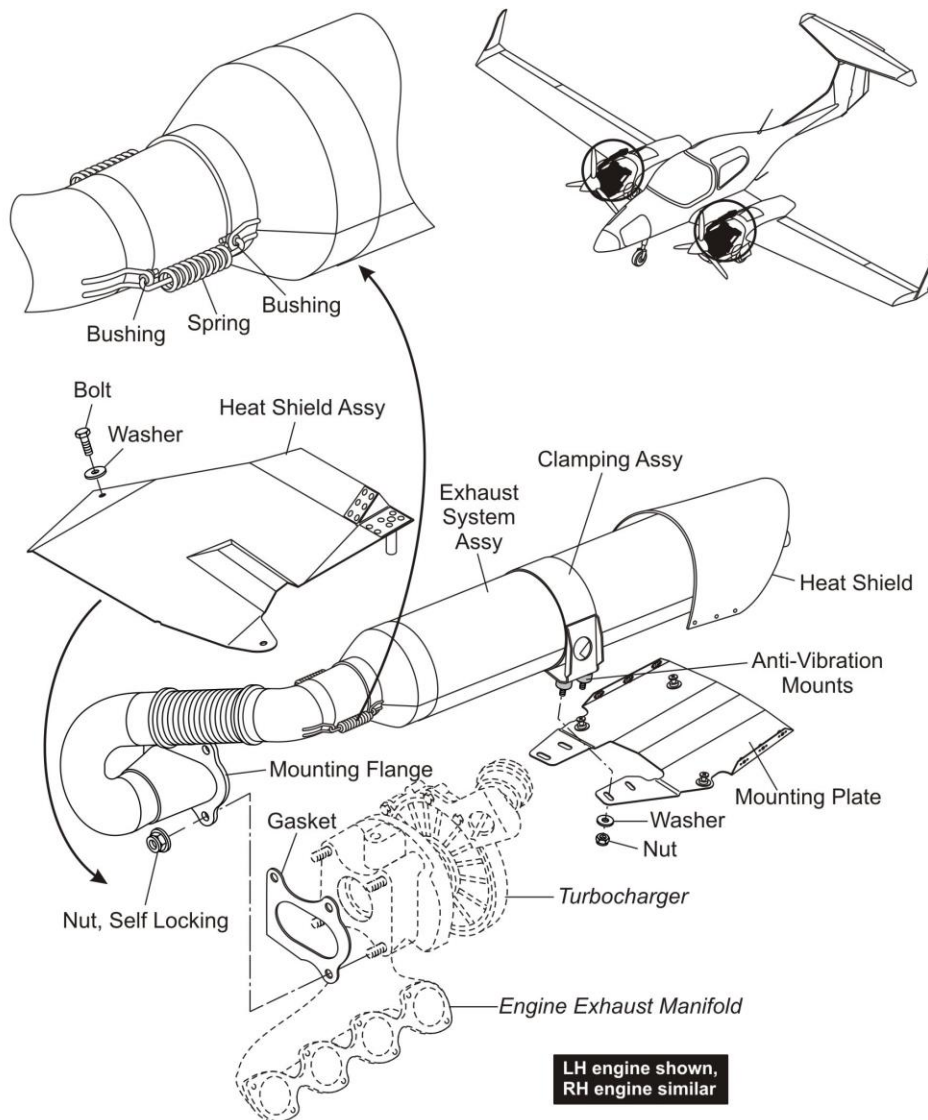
On Top Exhaust System Installation (OÄM 42-173/k through OÄM 42-173/p), Exhaust Tube Part Number: D65-7806-10-00\_4
